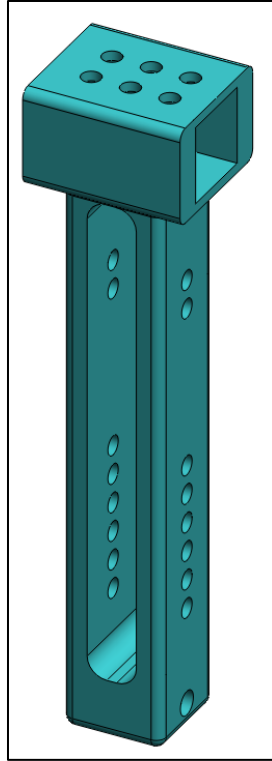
DOUBLE ROD TUNNEL PIN AIMING GUIDE
